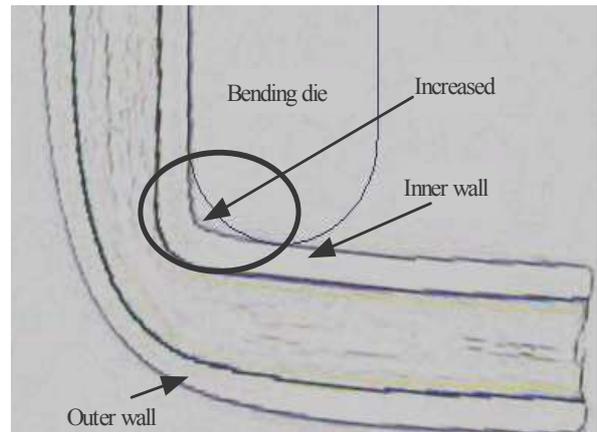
The axial cross-section of bended tube when the mandrel shift is changed from 4mm to 1.5mm
